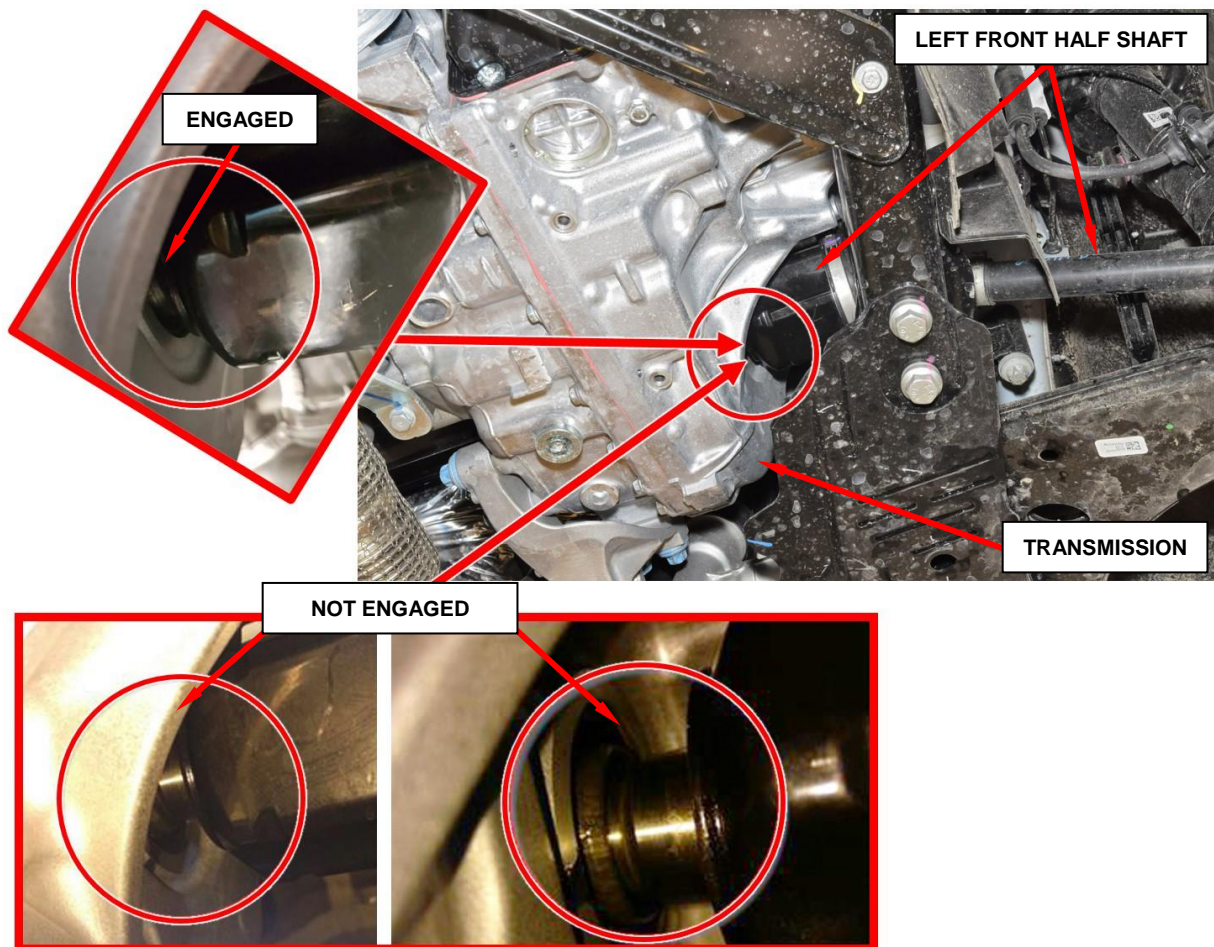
Inspect Left Front Half Shaft Engagement Into Transmission
